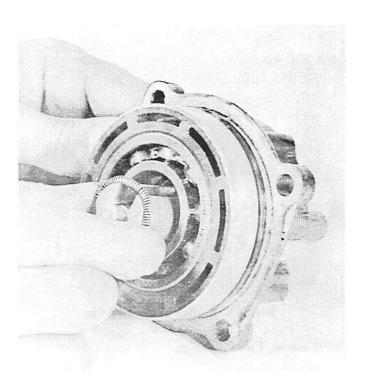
Inserting Ball Bearing Puller into End Cap Ball Bearing
